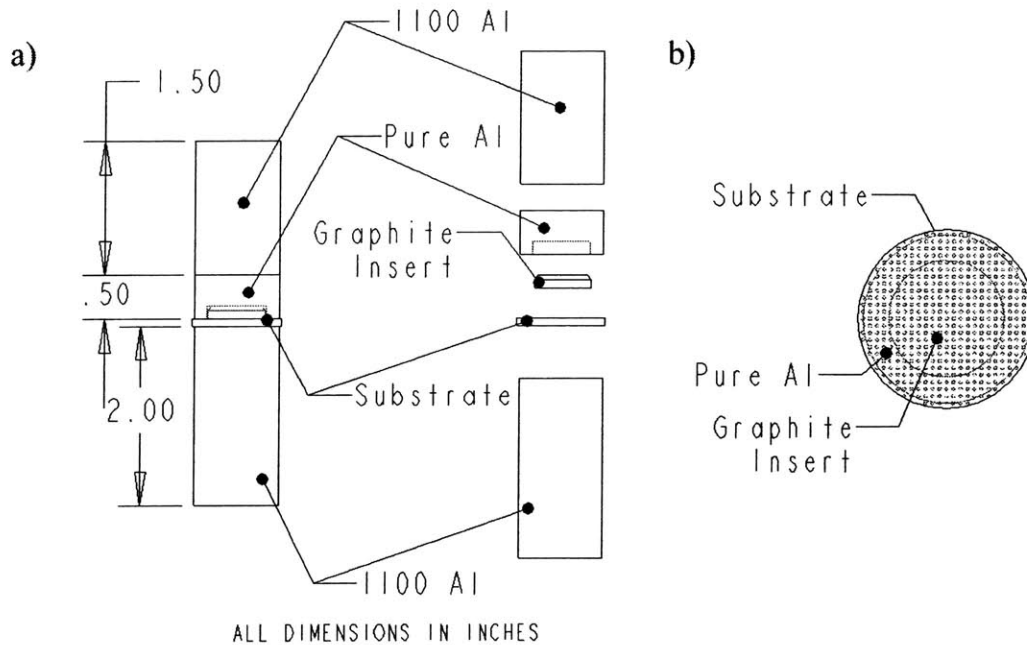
Tension/shear: traction/separation experimental specimen: (a) bonded specimen and exploded view of specimen; (b) view of interface from below substrate; dot pattern on other side of substrate, pure Al, and graphite insert seen through clear substrate.
